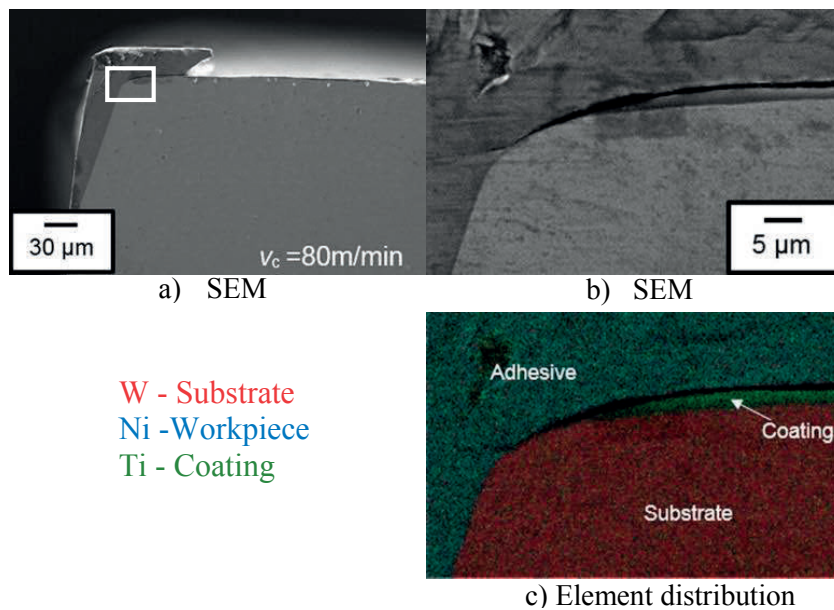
SEM and EDS in the machining of Inconel 718 at 80 m/min with TiAlN coated carbide tool.
